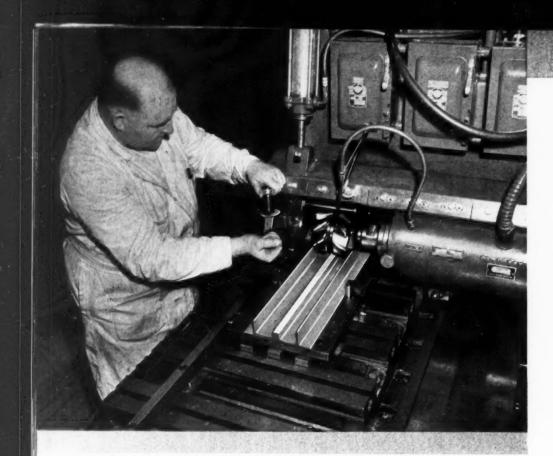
(Left) Horizontal Cutterspindle on the Profile Milling Machine Shown in Fig. 2, which is Equipped with Two Cutters for Milling Deep Channels in Extruded Beams
